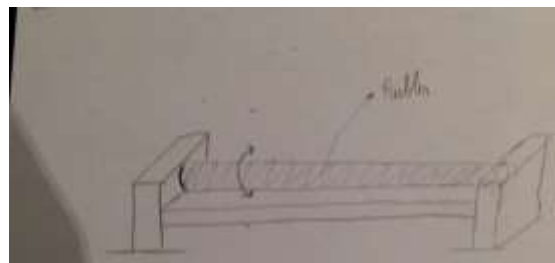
Current clamping system with an off-axis roller with a rubber grip.
